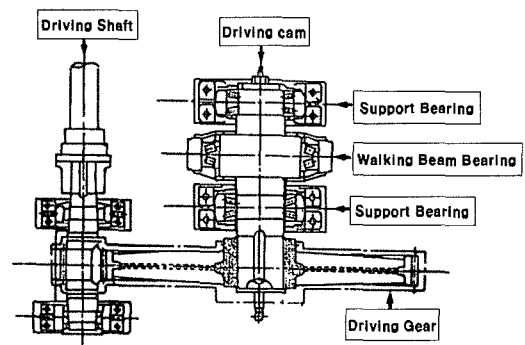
Mechanical structure of Walking Beam roller bearing.
